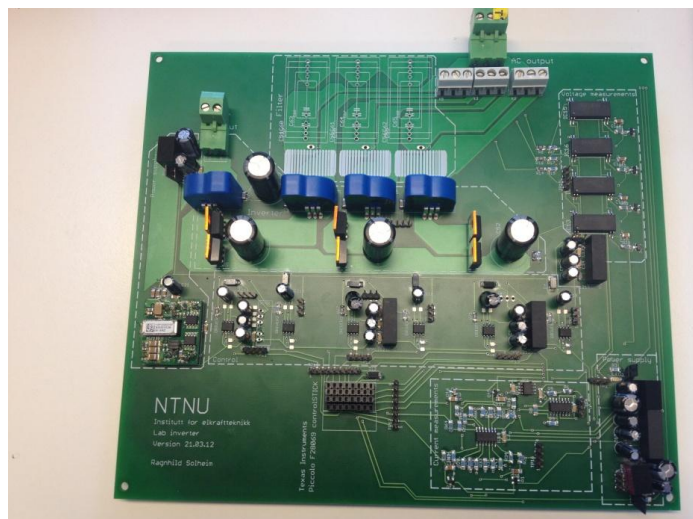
THE PCB WITH ALL COMPONENTS SOLDERED ONTO IT
